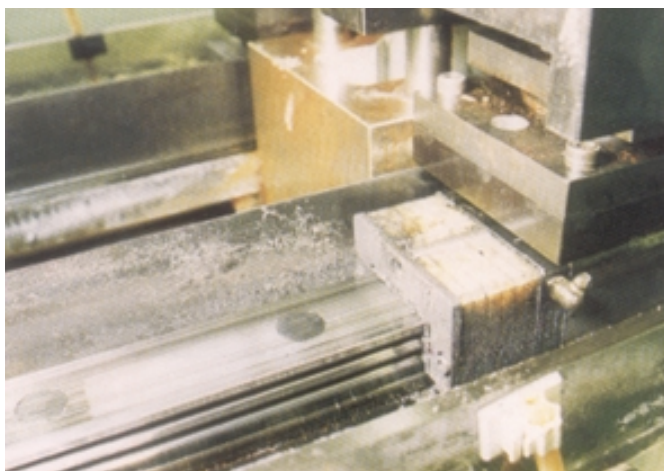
Endurance test of a linear guide exposed to cutting coolant contaminated with cast iron dust
